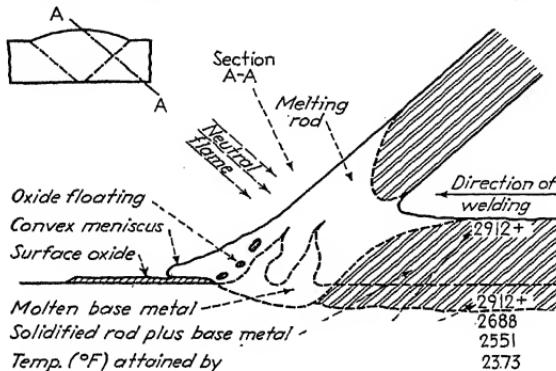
Diagram of welding with a neutral flame.
